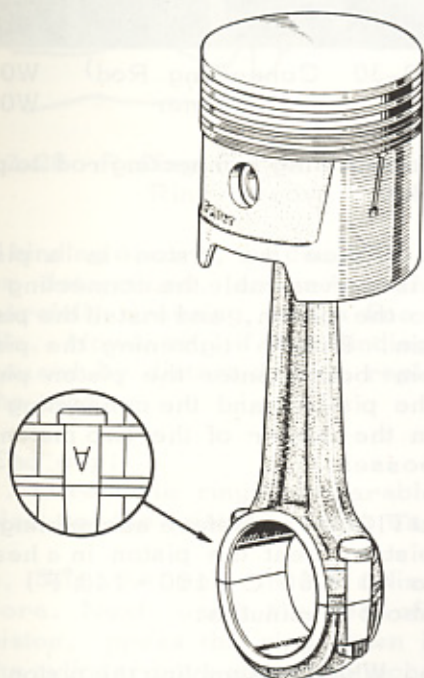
Marks on Piston, and Connecting Rod X4946
